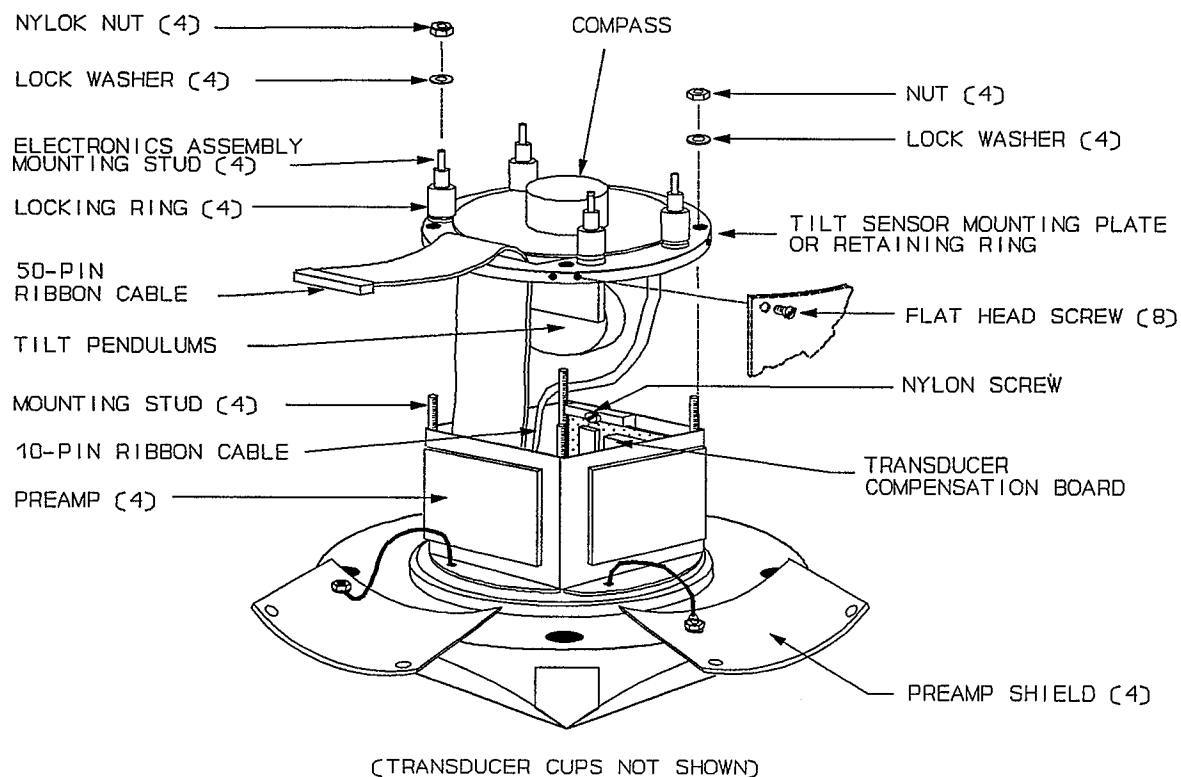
SC-ADCP Transducer Assembly Parts Identification
